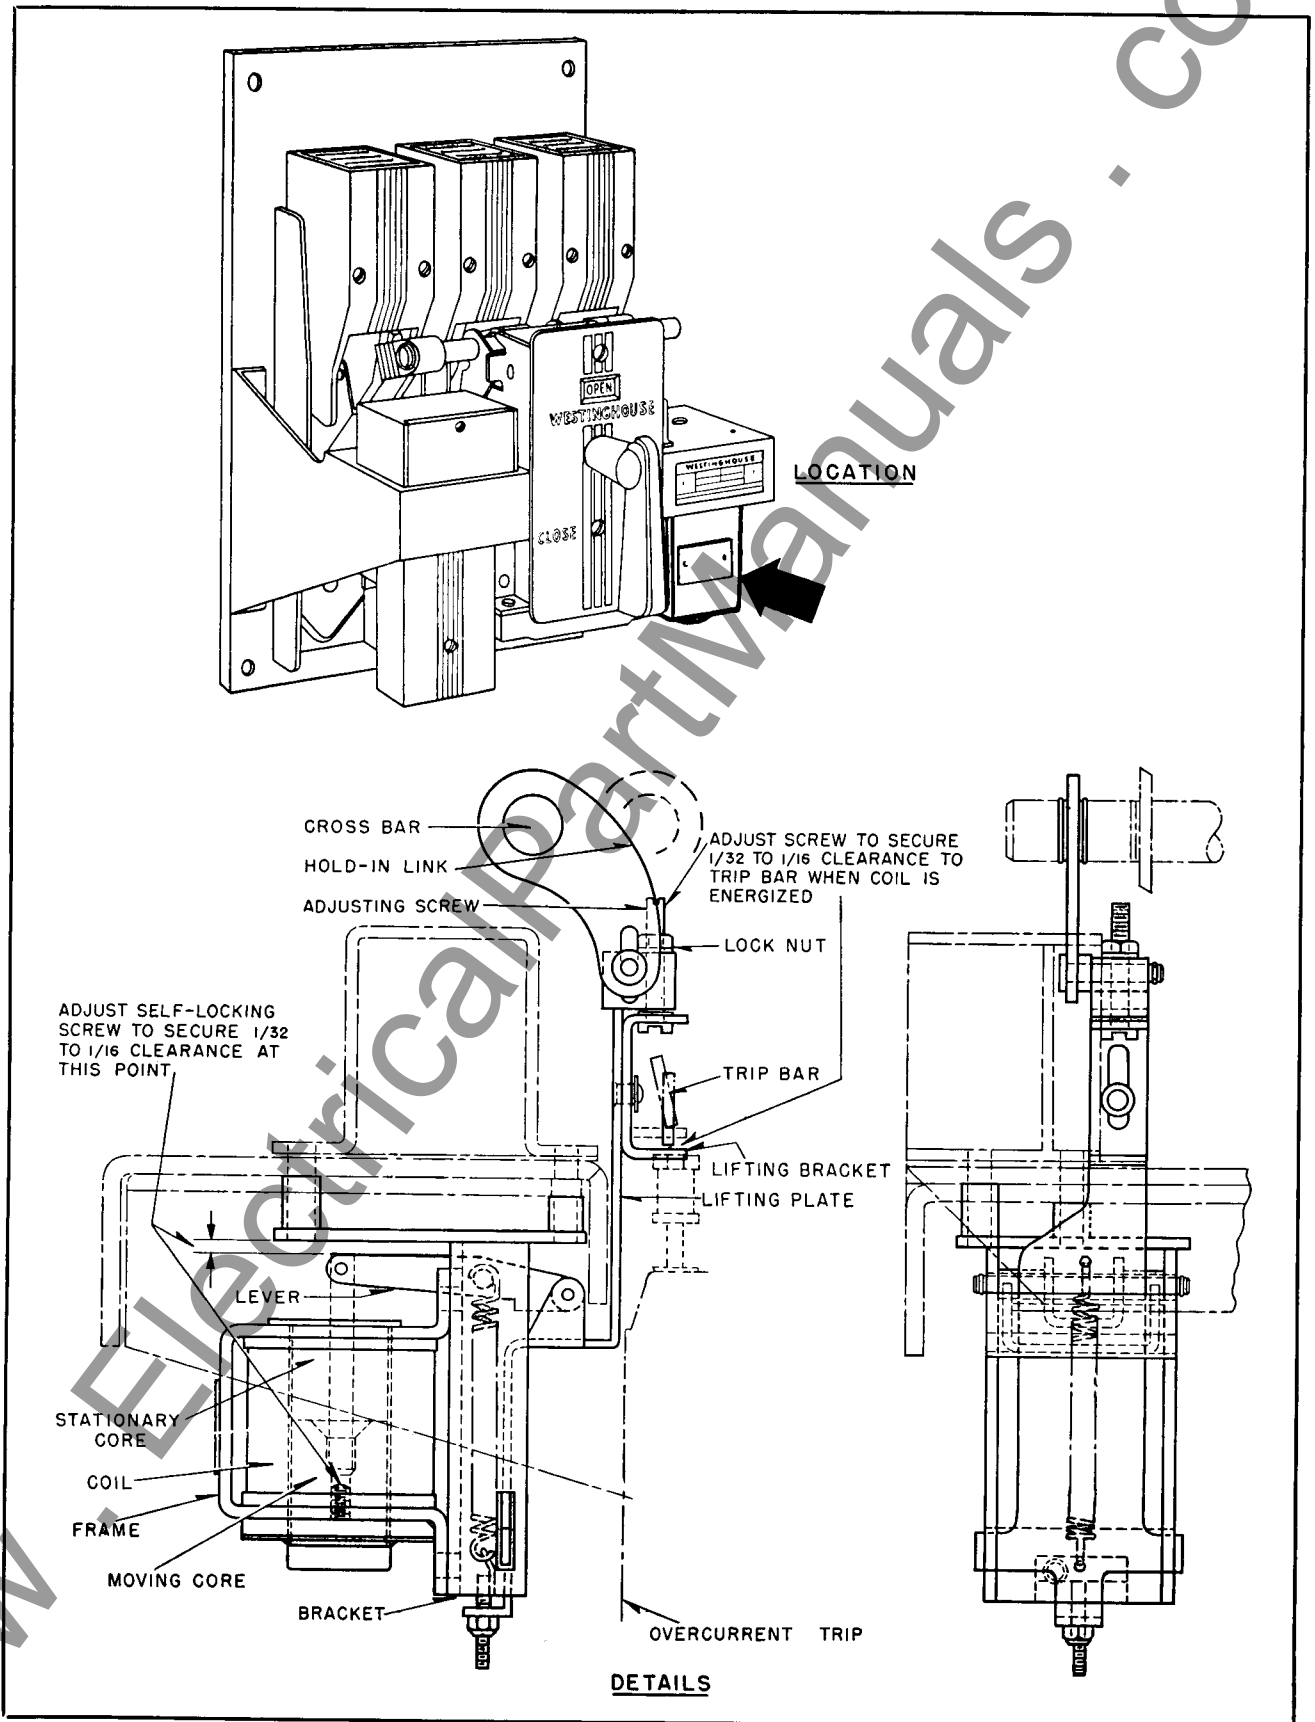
Electric Lockout Attachment—Location and Construction Details
